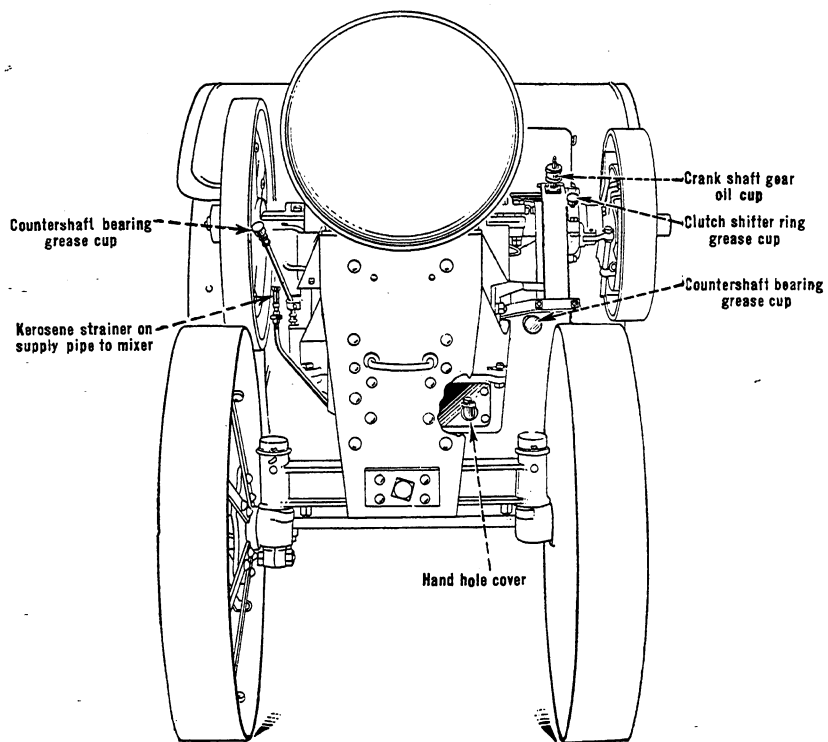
Illustration No. 2—Front of tractor, showing hand hole cover, etc.
